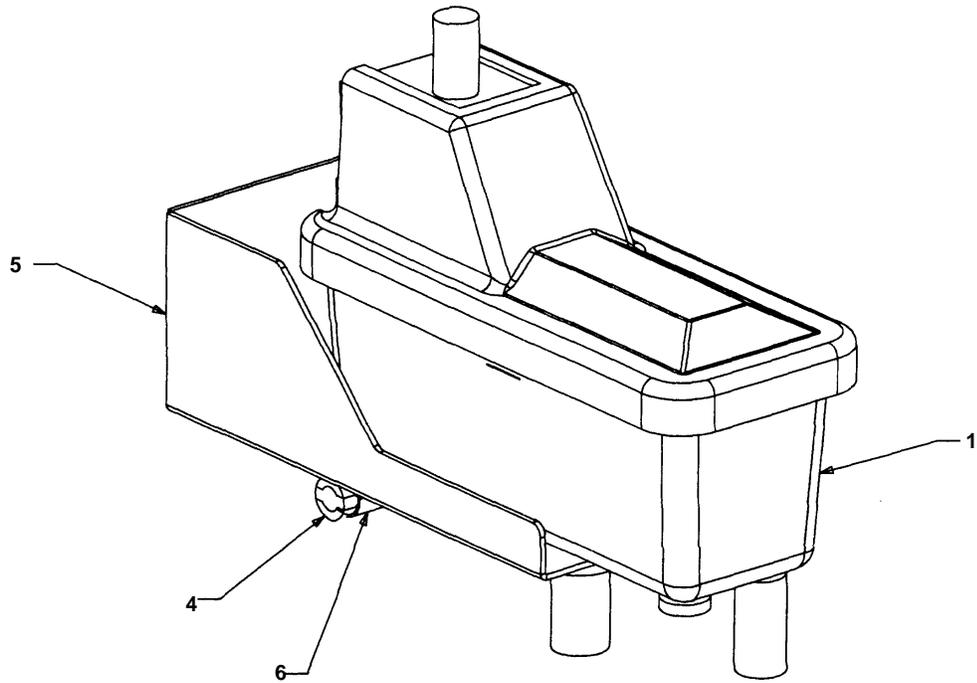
DISPENSE MECHANISM ASSEMBLY AND PARTS LIST
